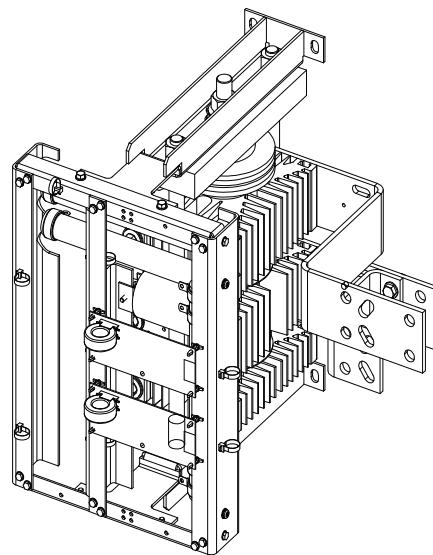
Power Stack Dimensions - 3300/4160V, 180/360A
